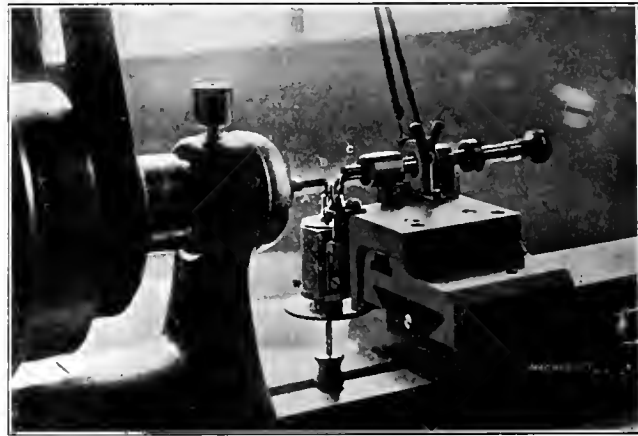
Milling a Small Counter-bore in a Bench Lathe
